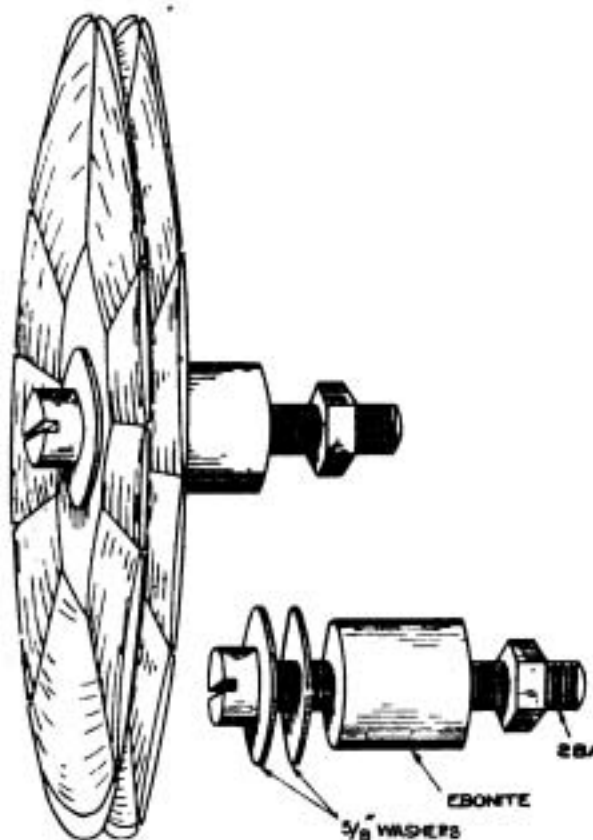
Transformer consisting of two basket coils wound on card support and clamped together.
